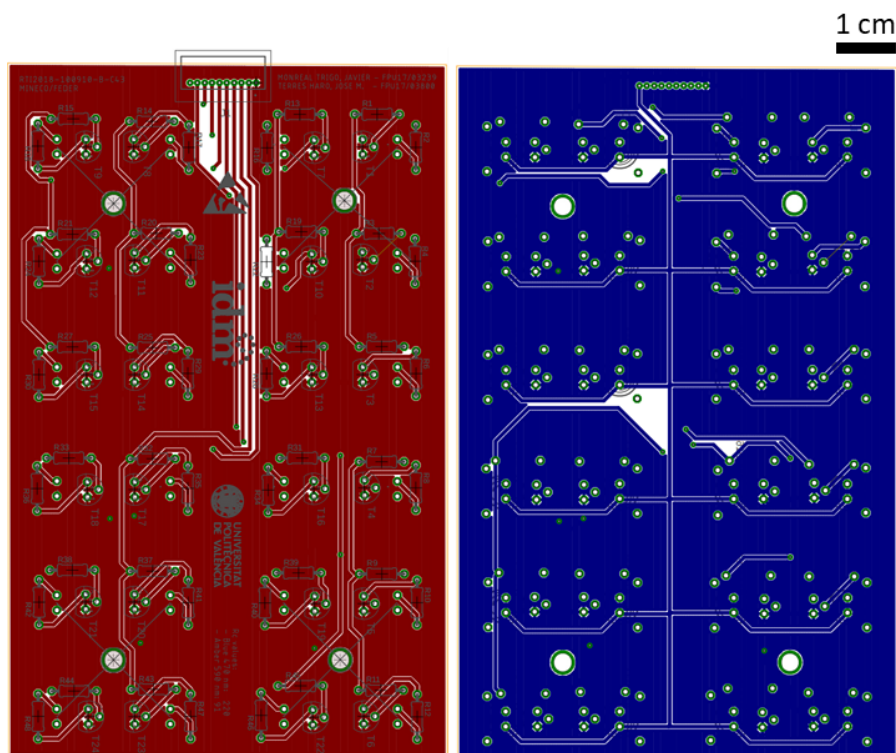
OSIVE Slim 24-LED PCB top layer (left) and bottom layer (right). Obtained with EAGLE © 2022 Autodesk.
